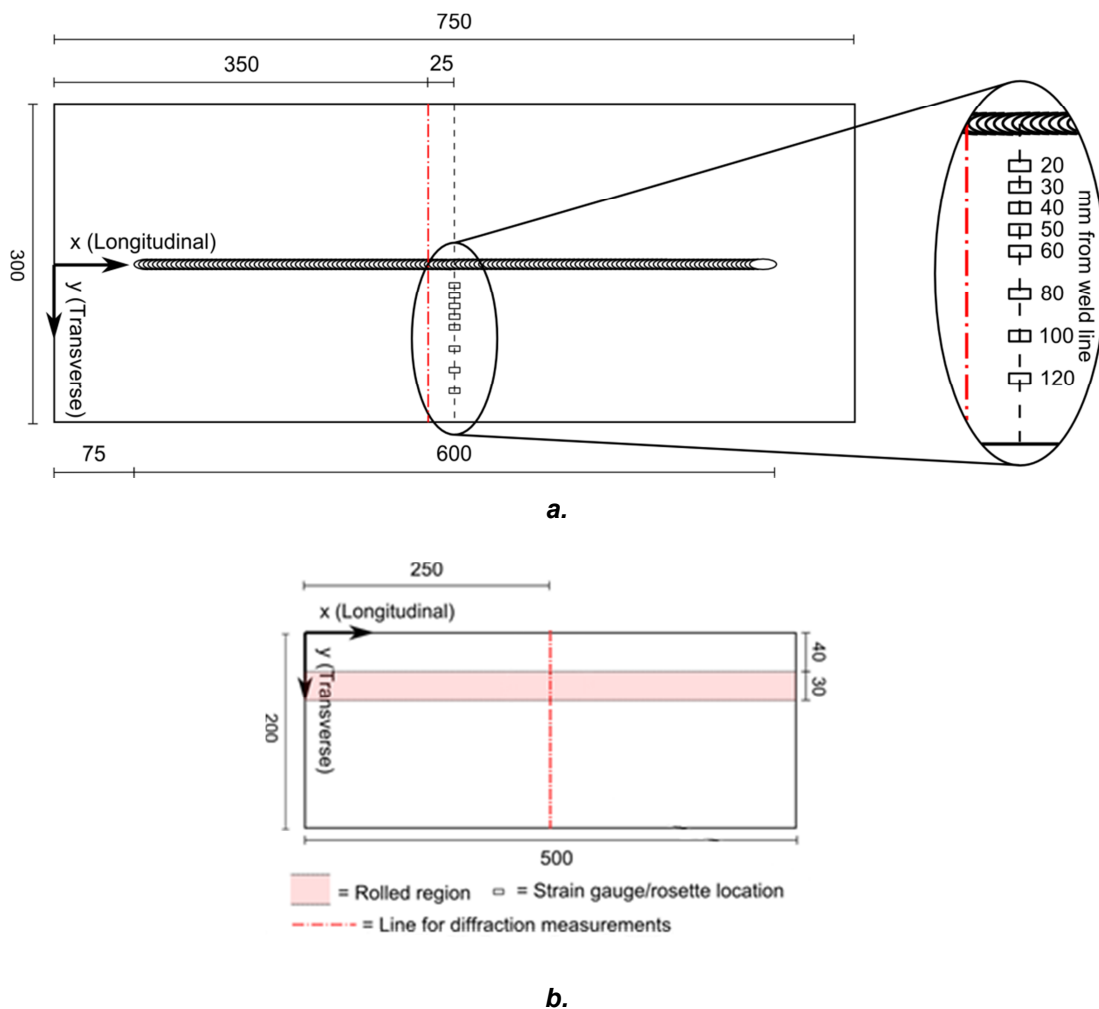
Strain measurement locations [4]: a. welded sample with 3 mm thick plate; b. pre-weld rolling plate.
